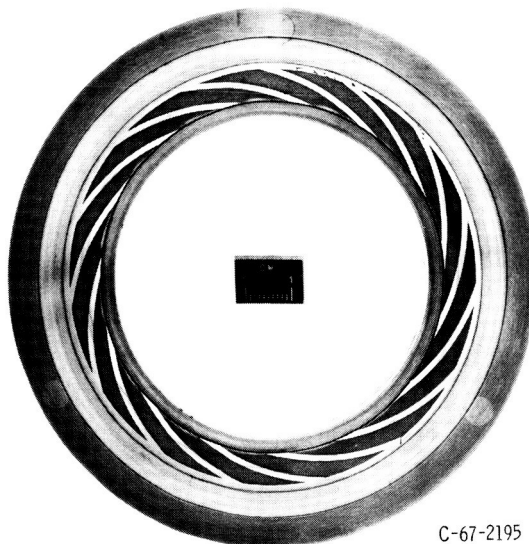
Seal nose piece with chemically etched inward-pumping spiral grooves.
